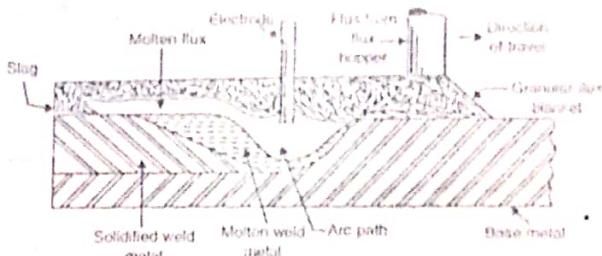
(a). Principle of Submerged Arc Welding
